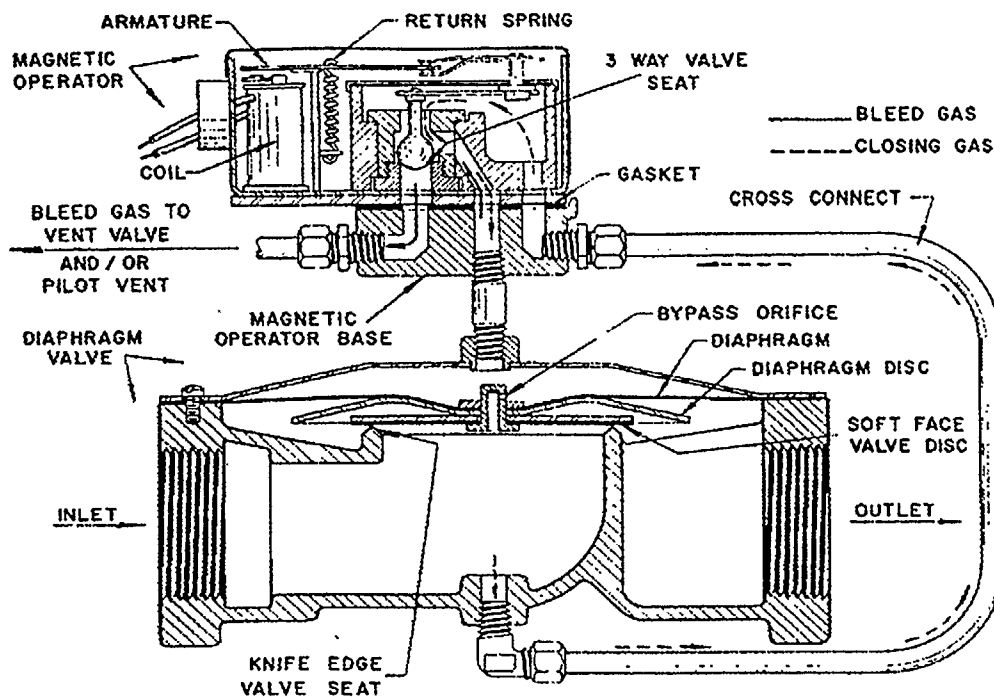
DIAPHRAGM VALVE AND MAGNETIC OPERATOR
